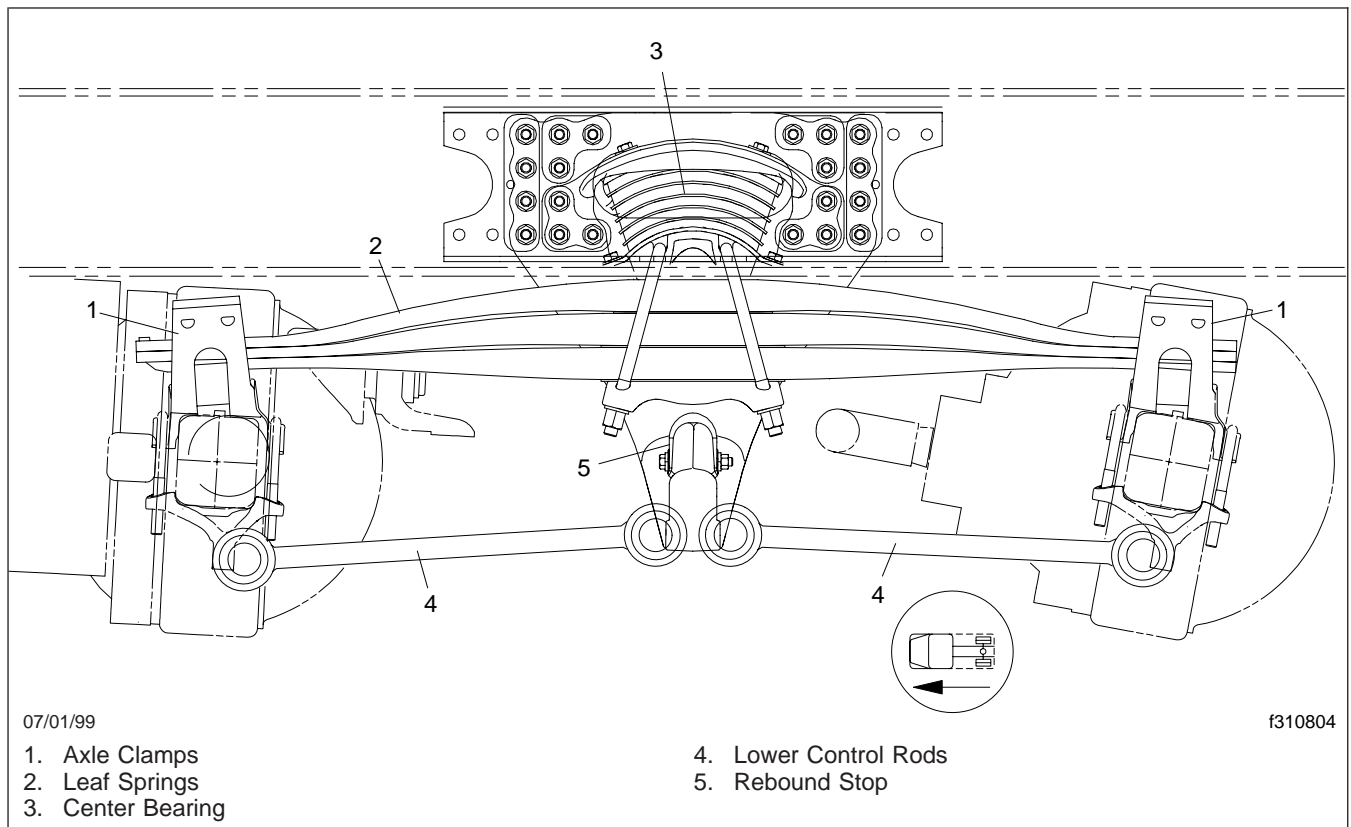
, TufTrac Suspension (46,000-pound [20 865-kilogram] version shown)
